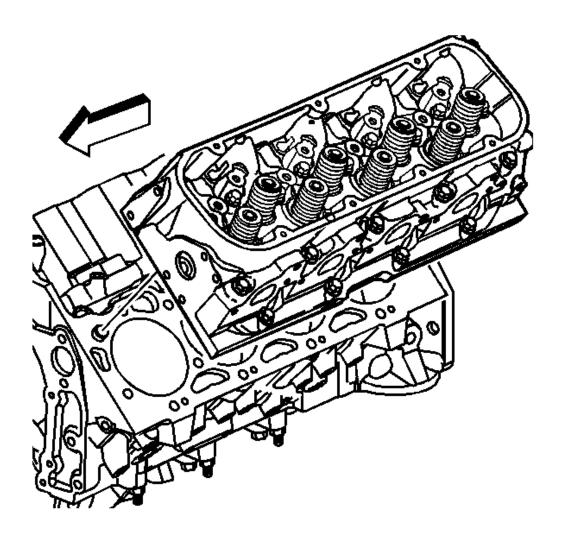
View Of Left Cylinder Head And Alignment Pin Courtesy of GENERAL MOTORS CORP.
